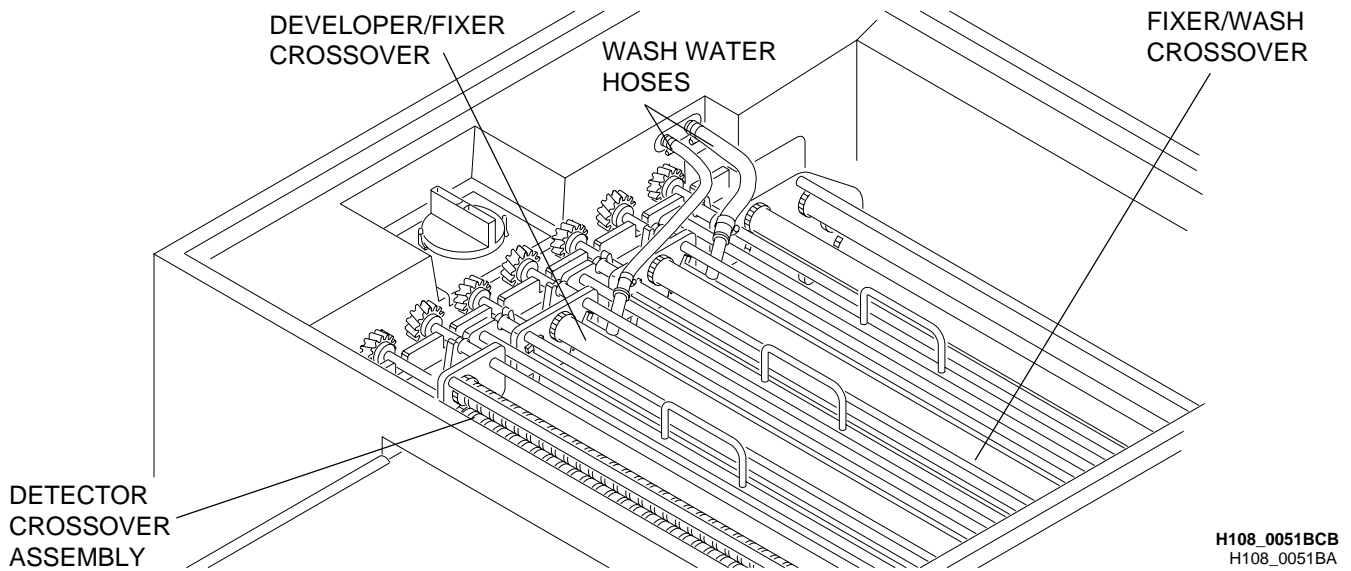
Removing Crossovers and Disconnecting the Water Hose
